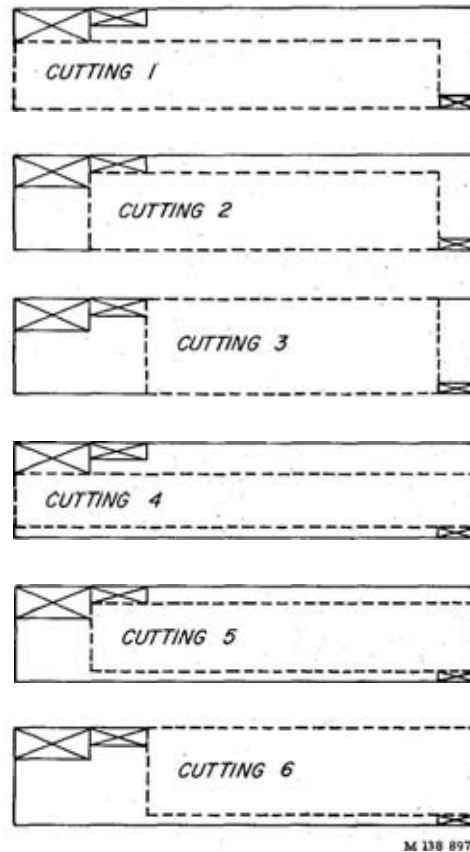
All possible cuttings located by MCA for this board are shown in the order in which they are found. X-bearing rectangles enclose defects.
